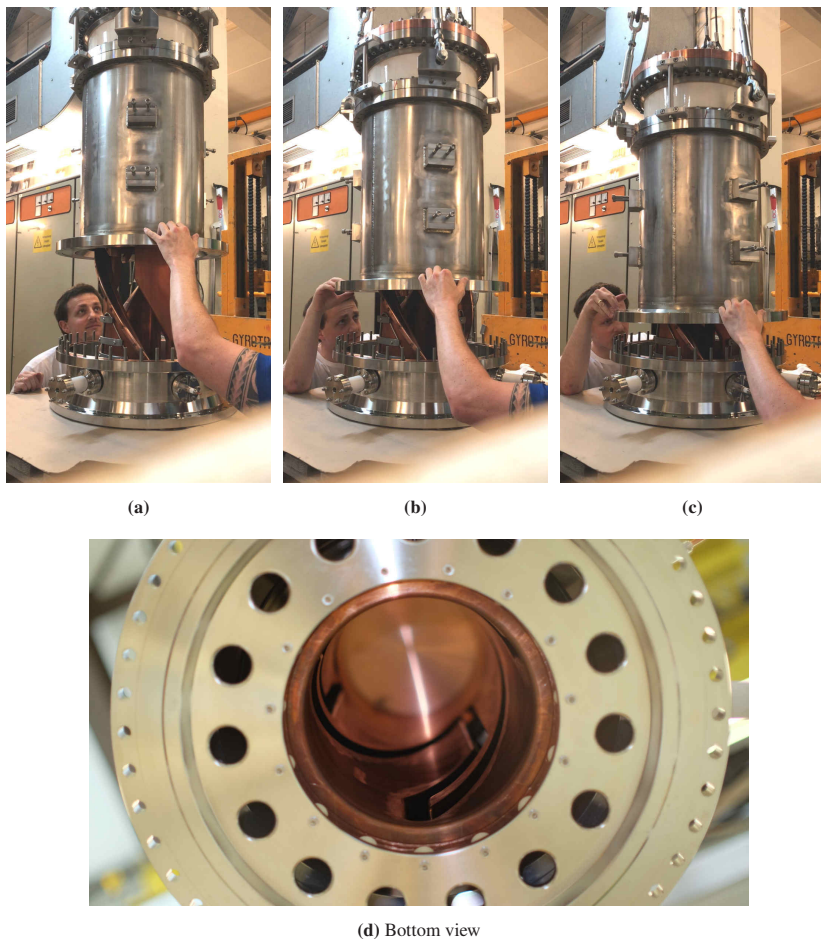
Closing of the vacuum housing with electrodes (a), (b) and (c). View from the bottom of the assembled MDC prototype (d).
